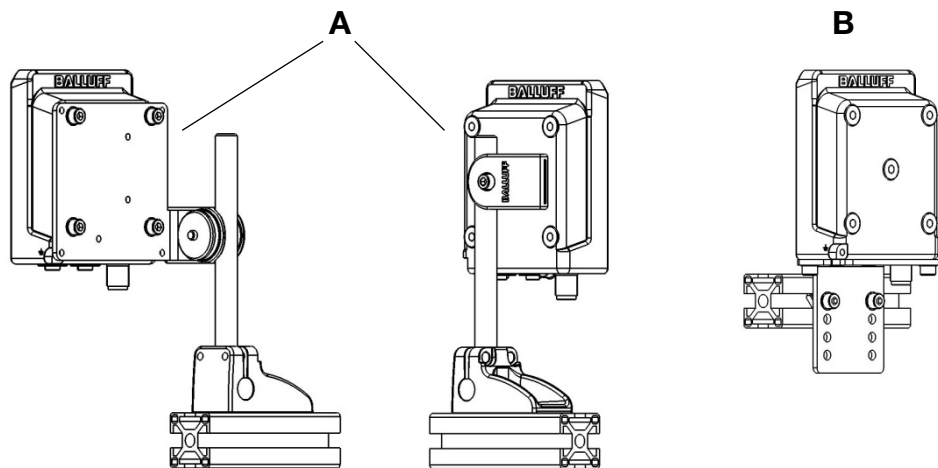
Mounting examples (A: Using Balluff Mounting System, B: Using mounting bracket on T-slot profile)
